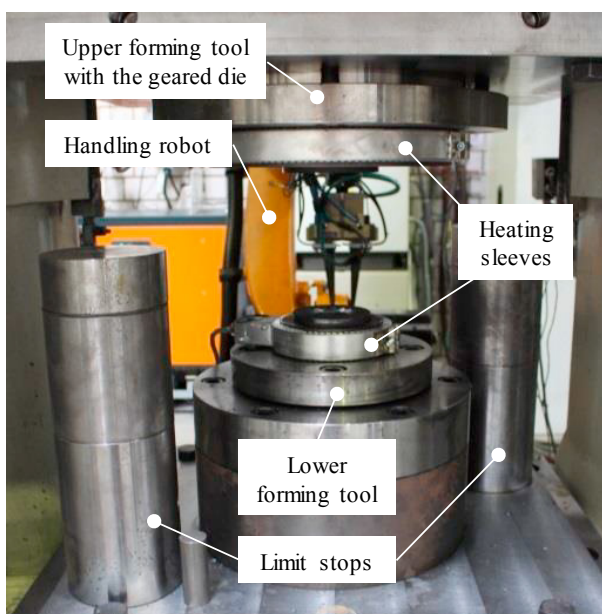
Forming tool system for die forging of bi-metal bevel gears.
